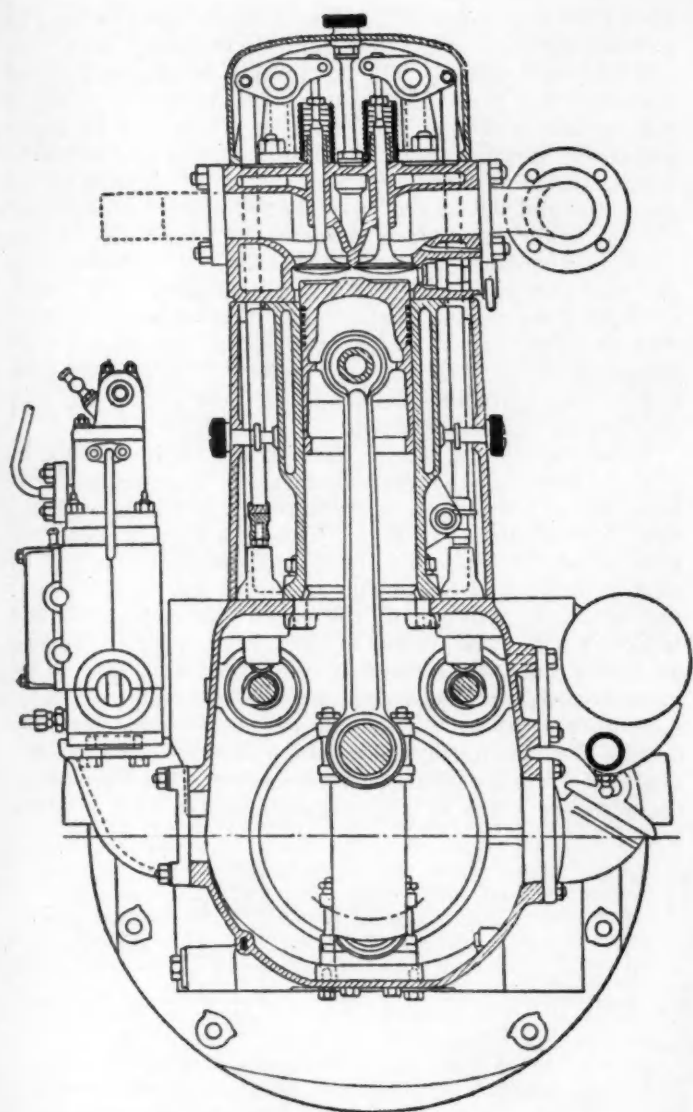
SECTIONAL VIEW OF THE M.A.N. MOTOR-TRUCK ENGINE. The Weight Is 22 Lb. per Hp. for the 50-Hp. Rating at 1000 R.P.M. The Fuel Consumption Is Said To Be Most Favorable at 800 R.P.M. When, Under Full Load, It Is 0.44 Lb. per Hp-Hr.
